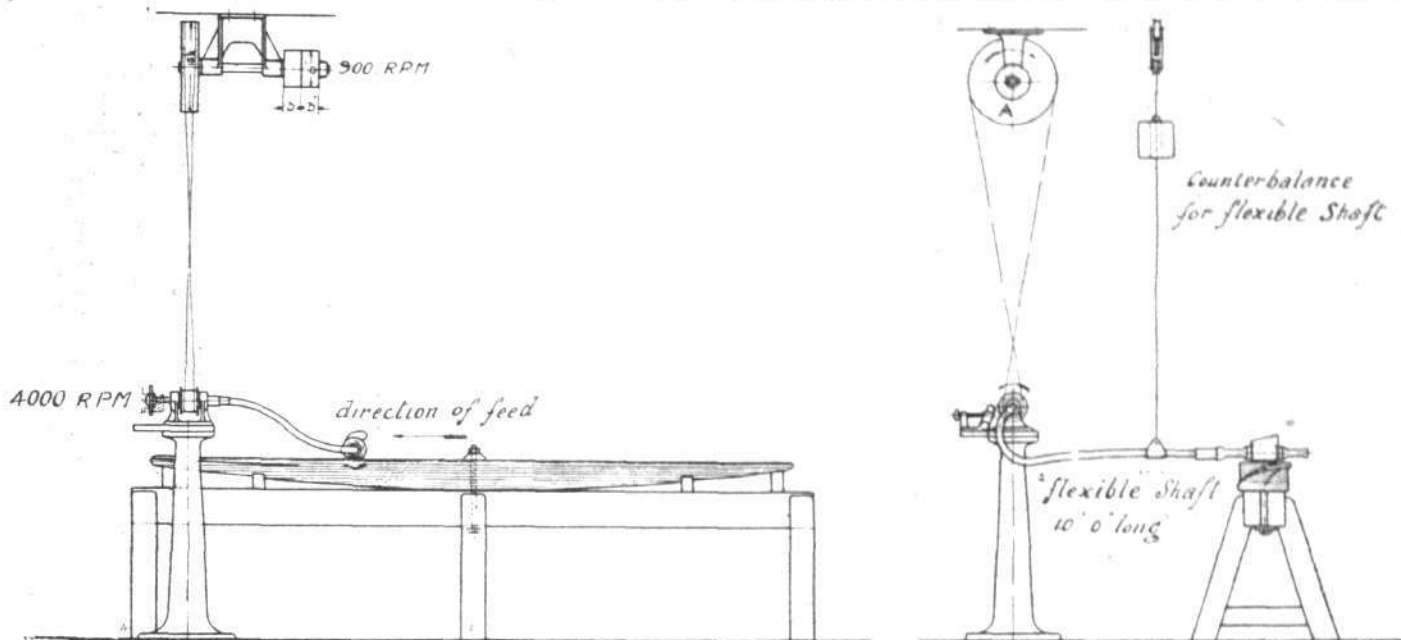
SHOWING THE FLEXIBLE SHAFT DRIVE ARRANGEMENT.—The countershaft, A, must be placed directly over the centre of the stand and drive by cross-belt as shown. Belt $1\frac{1}{2}$ ins. wide.
